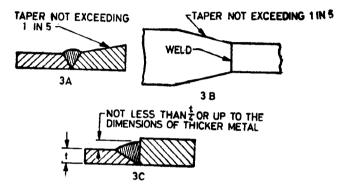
BUTT WELDING OF PARTS OF UNEQUAL THICKNESS AND UNEQUAL WIDTHS
